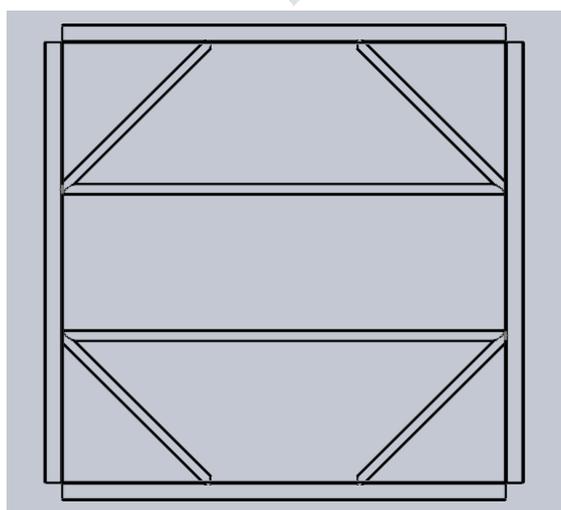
Top view of Duct with Single stiffener and pipe strut assembly
